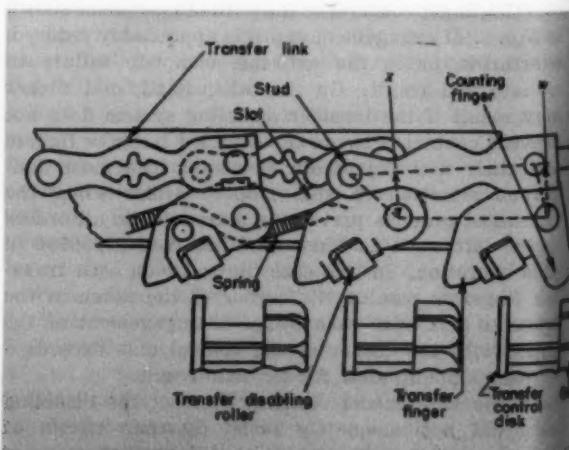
Left—Partial view of the calculator shows arrangement of parts in the new counting mechanism located in the shiftable carriage of the machine
